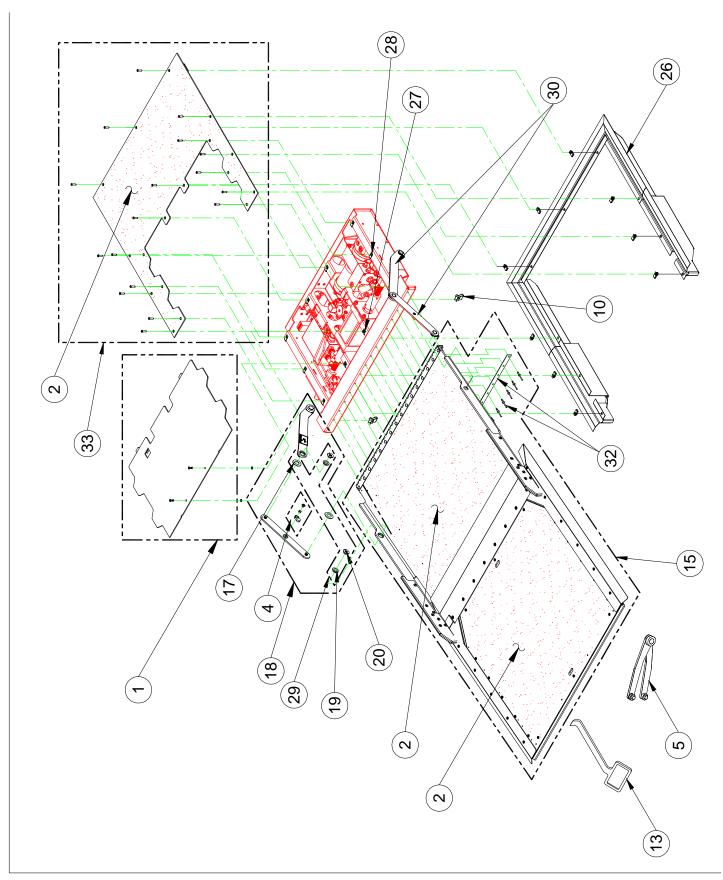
RAMP AND TOP SUPPORT ASSEMBLY SHEET-1
